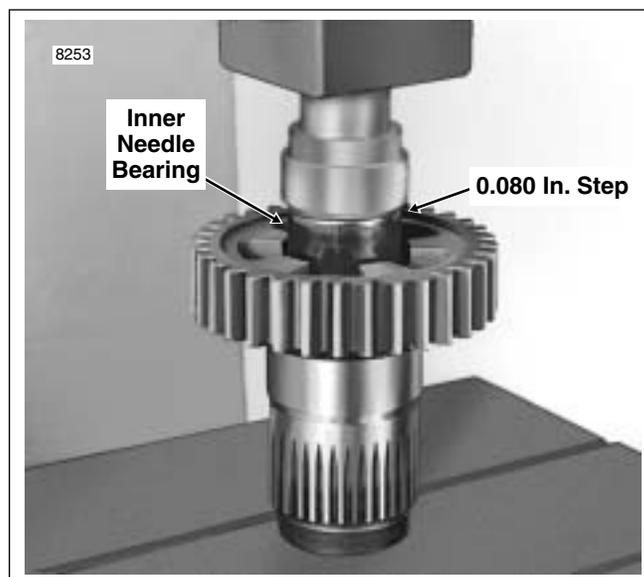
Press Transmission Side Needle Bearing into Main Drive Gear
